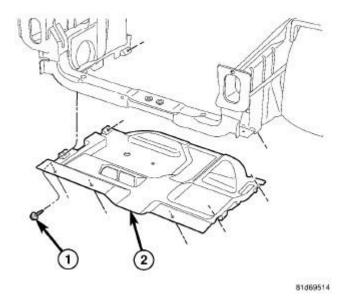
Front Lower Splash Shield Courtesy of CHRYSLER LLC
